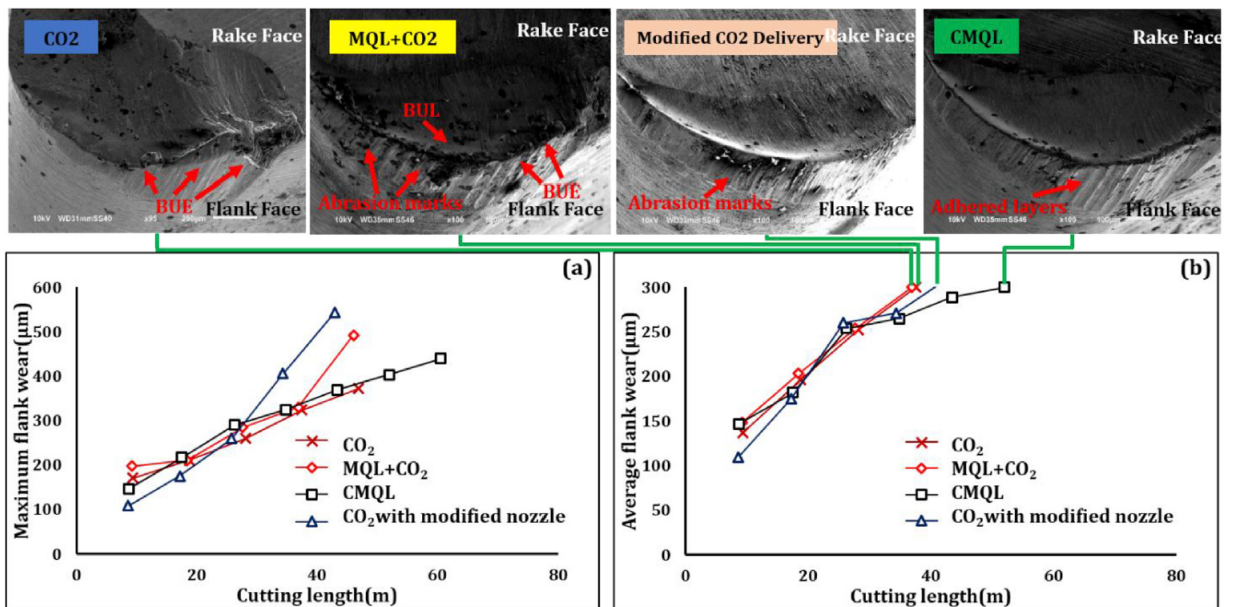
Tool flank wear progress as a function of cutting length when machining Inconel 718 under: CO₂, CO₂+MQL, CMQL and CO₂ (modified nozzle): (a) Maximum flank wear; (b) Average flank wear ($V_c=100$ m/min, $f=0.2$ mm/rev, $a_p=1$ mm, Uncoated carbide inserts TPGN160308) (Bagherzadeh and Budak, 2018).
